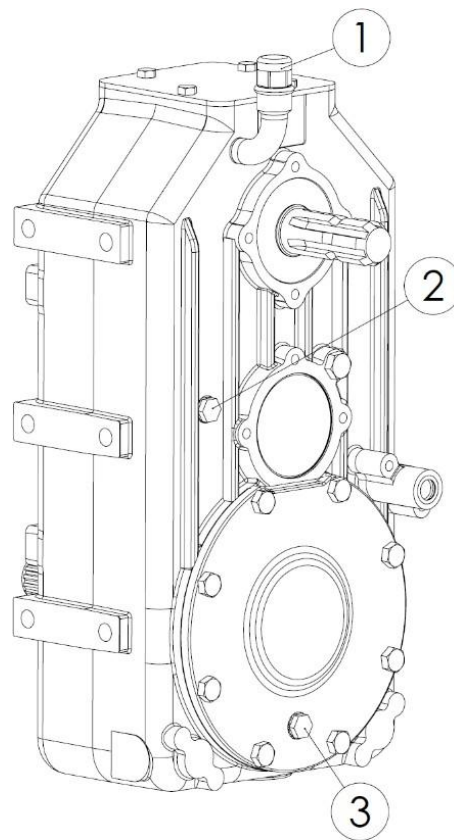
Oil change in a two-speed gear: 1 - oil filler plug, 2 - oil level plug, 3 - oil drain plug
